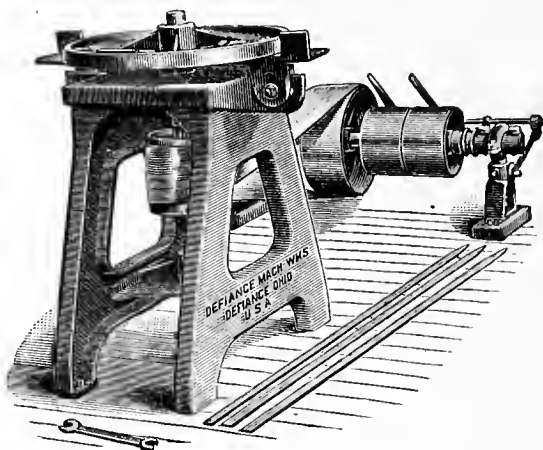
HAND-FEED HOOP LAPPING MACHINE.
